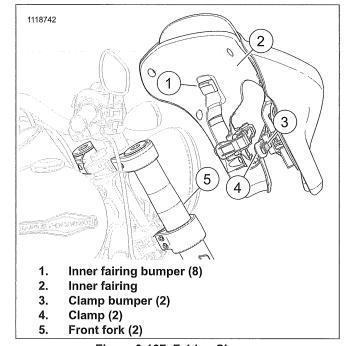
Fairing Clamps DISASSEMBLE AND ASSEMBLE
